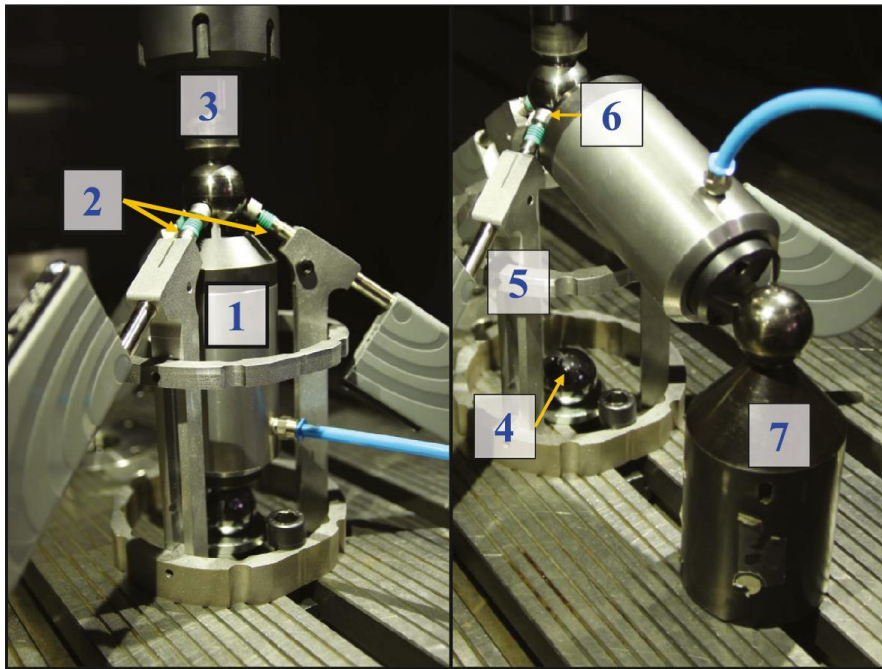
Measurement of machine tool cartesian translational stiffness including LDBB and LVDT [40].
